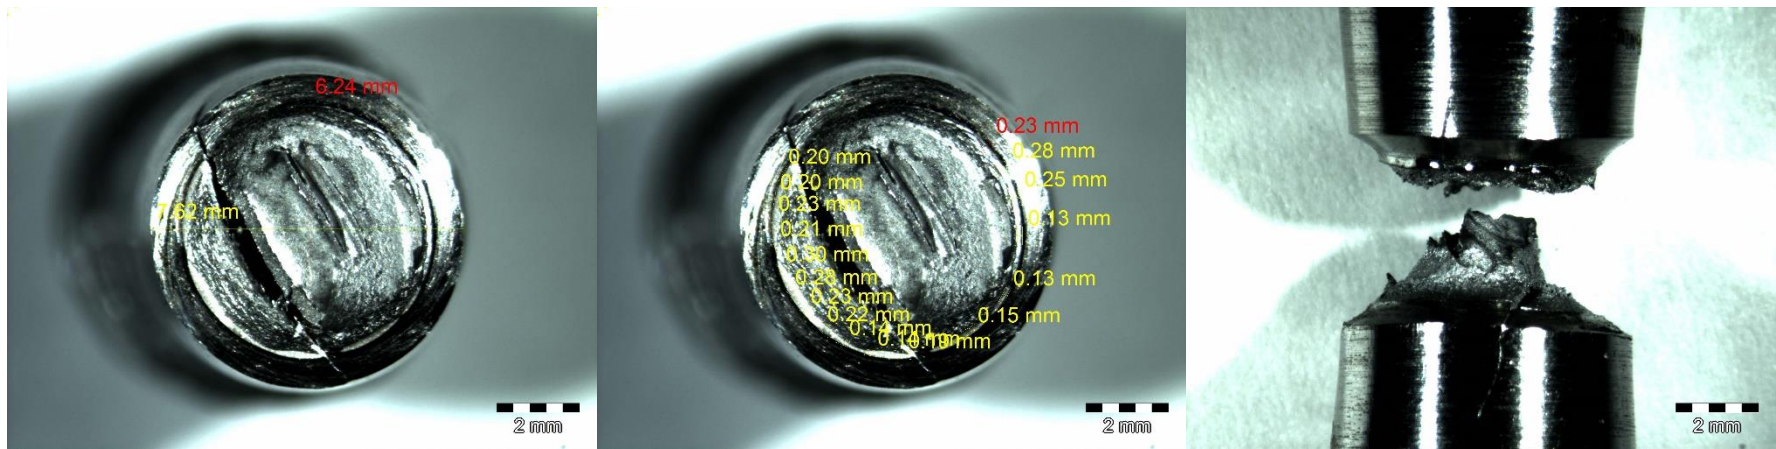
Cross-sectional and side view of fractured StxLSD-01
